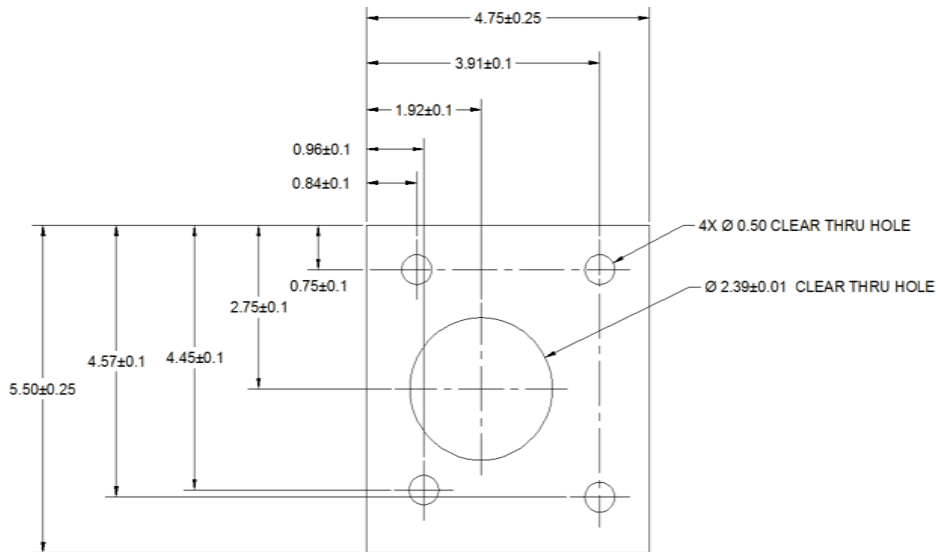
Compressor Exhaust Adaptor Dimensions (in Inches)
